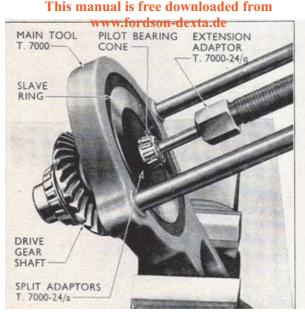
Removing the Pilot Bearing Cone from the Drive Gear Shaft
